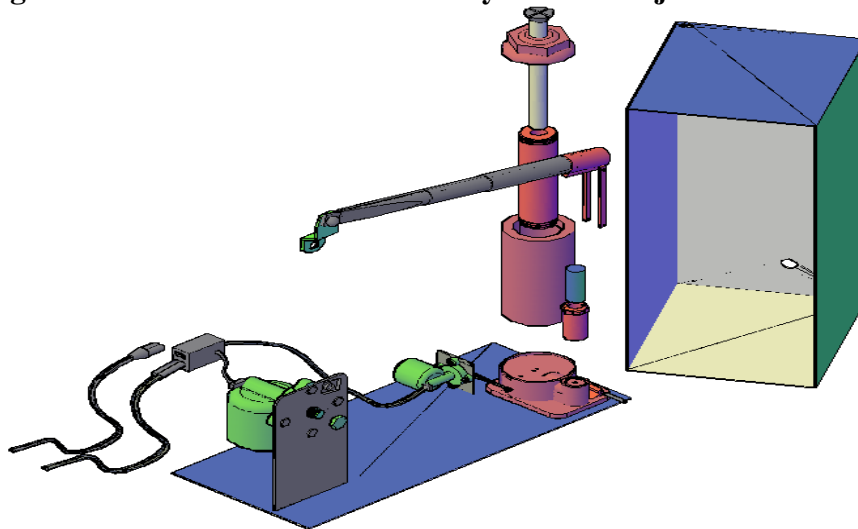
Exploded 3D view of the automatic hydraulic car jack.
